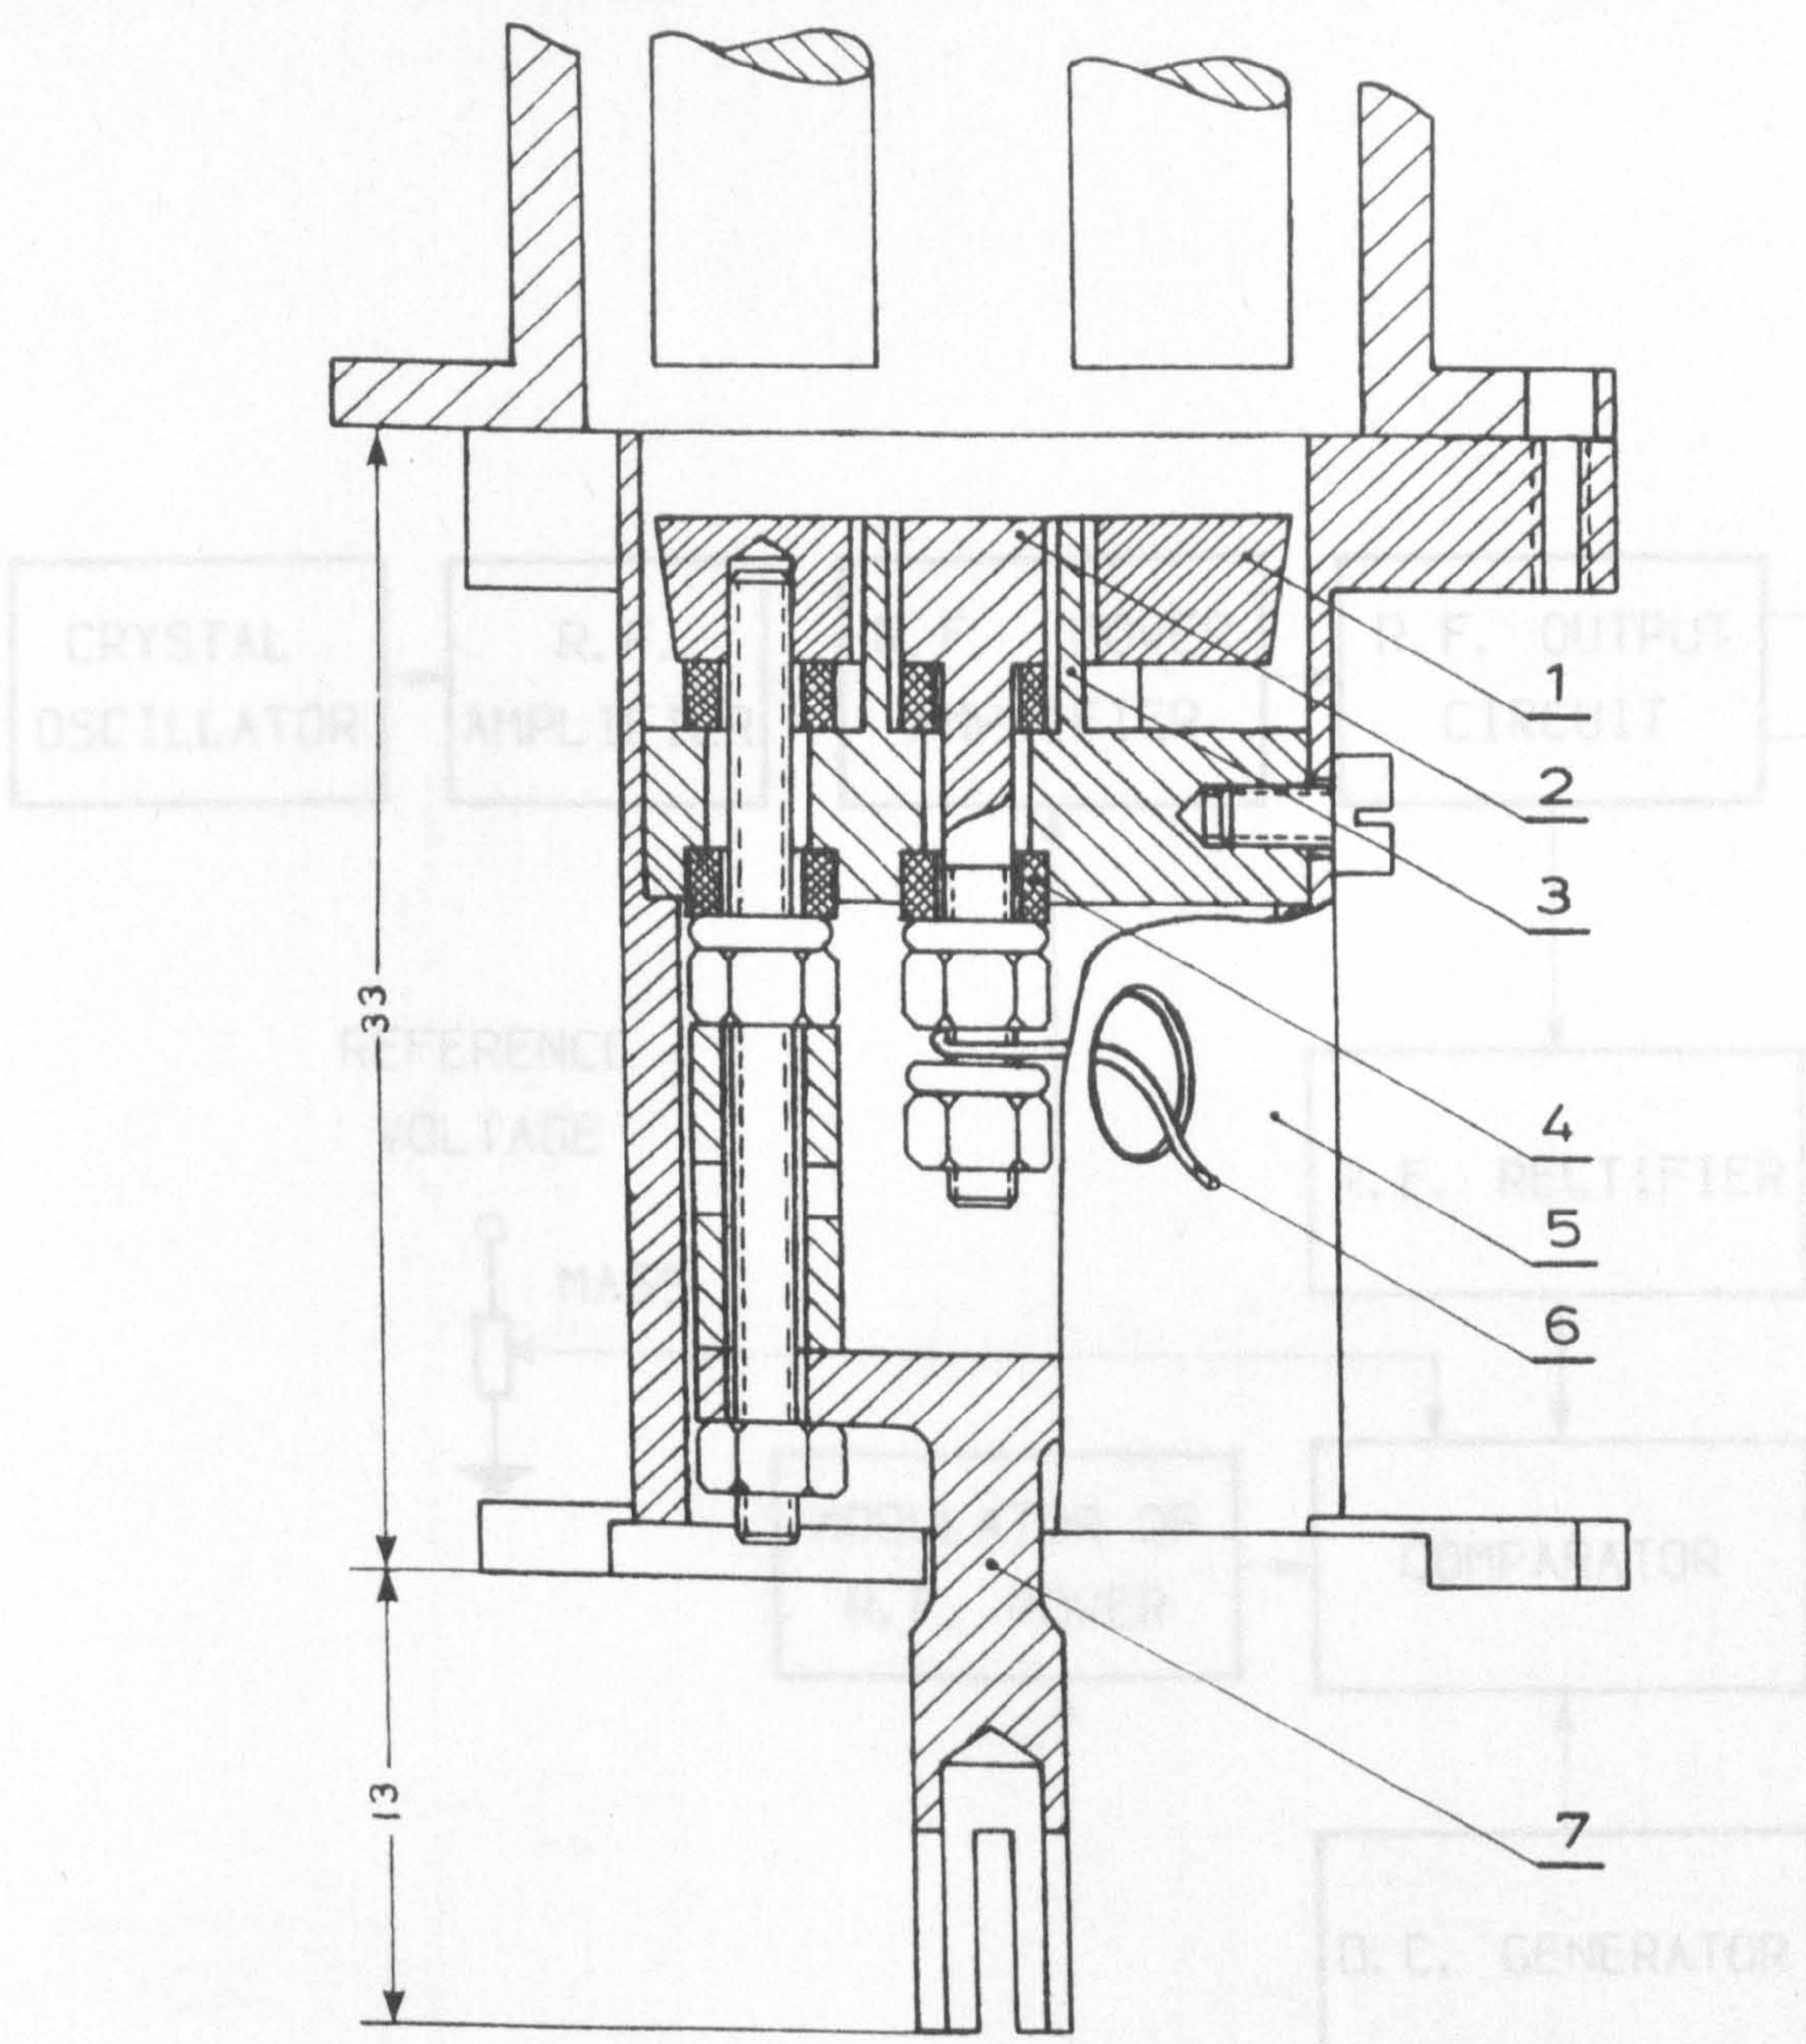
A SECTIONAL VIEW OF ROD ASSEMBLY AND MOUNTING WITHIN ITS HOUSING.
